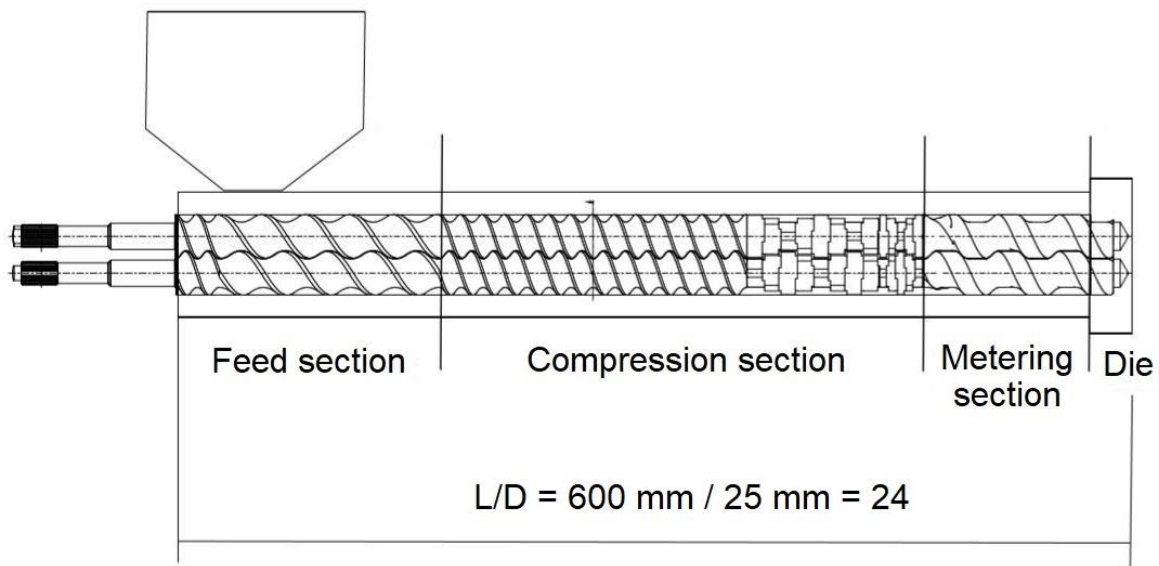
Twin-screw co-rotating extruder and screw configuration.
